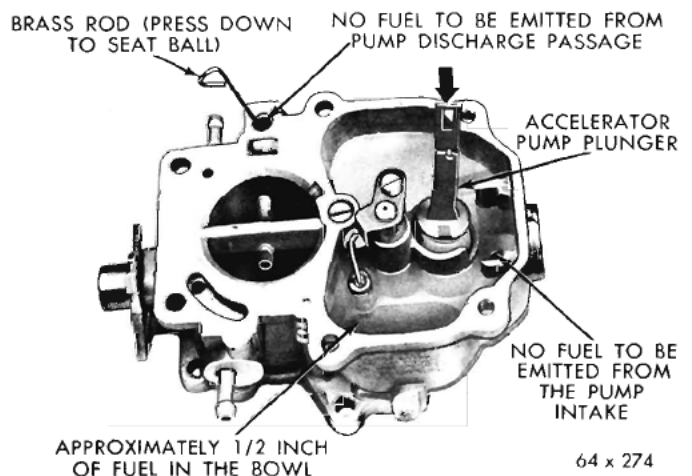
Testing Accelerator Pump Intake and Discharge Check Balls
